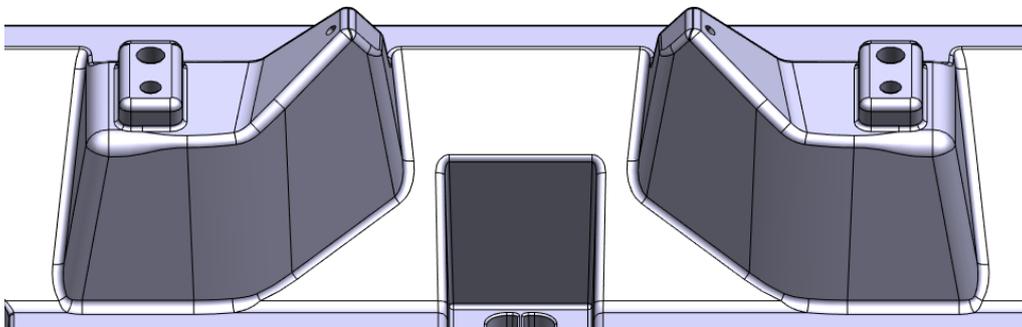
The two center console mounts. As can be seen the two M6 holes are located on slanting surfaces. These surfaces are there to self align the center console during the installation.
